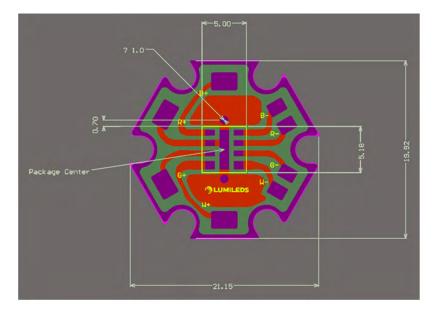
Overall dimensions of example PCB footprint design for LUXEON 5052 RGBW. Dimensions in mm.
